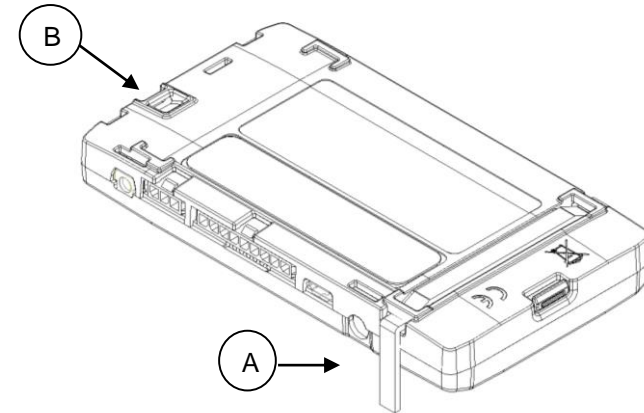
There are three mounting lugs on the sides of the A9 PRO device cover. Install the A9 PRO device using these mounting lugs with the cable tie A. Put the cable tie through the openings. There is also an optional cable tie opening B which can be used. Maximum width of the cable tie is 4,8mm.
